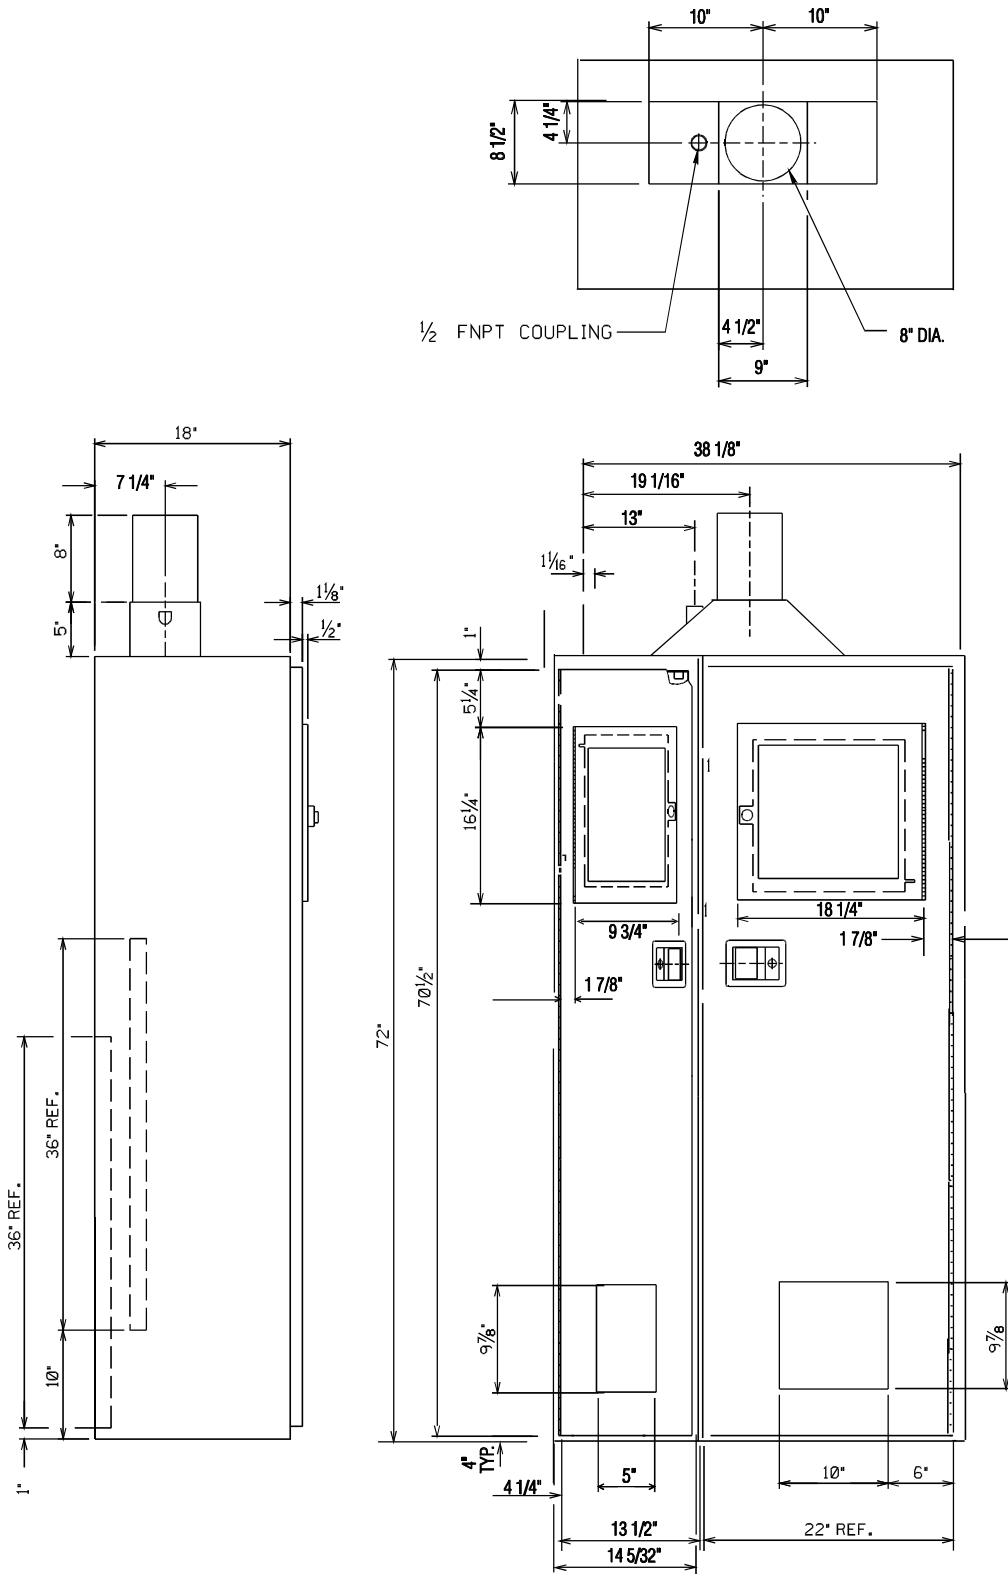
Outline Dimensions for 3 Cylinder Cabinet
